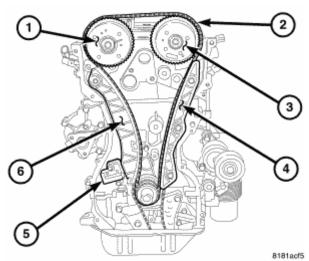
TIMING DRIVE Courtesy of CHRYSLER LLC
